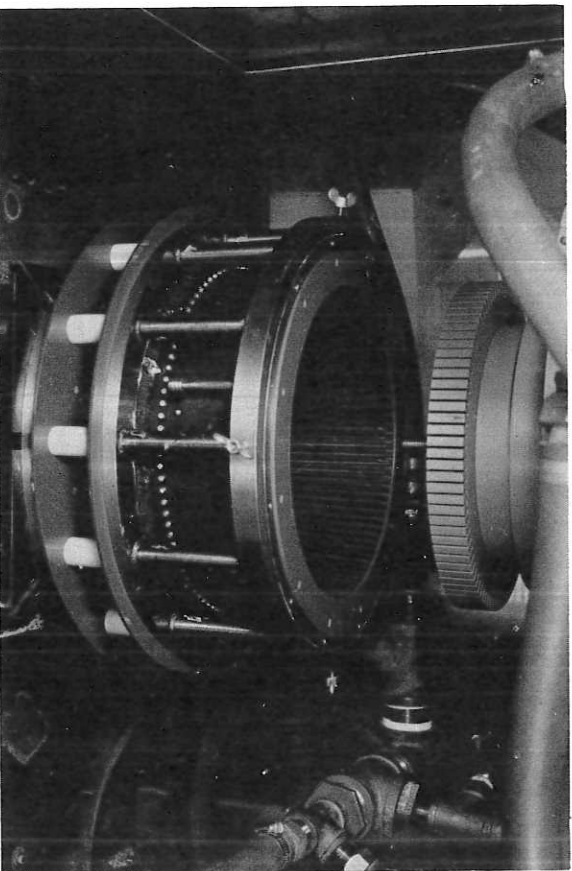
Bank of tapered tools and locating fixture for machining the slotted turbine wheel shown in Figure 8.6.
